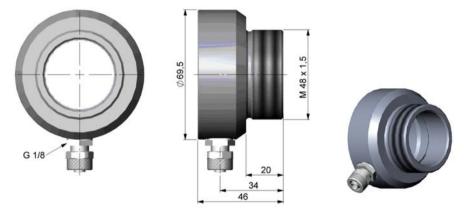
Dimensions Air Purge Collar [TM-AP-CTL], hose connection: 6x8 mm, thread (fitting): G 1/8 inch
